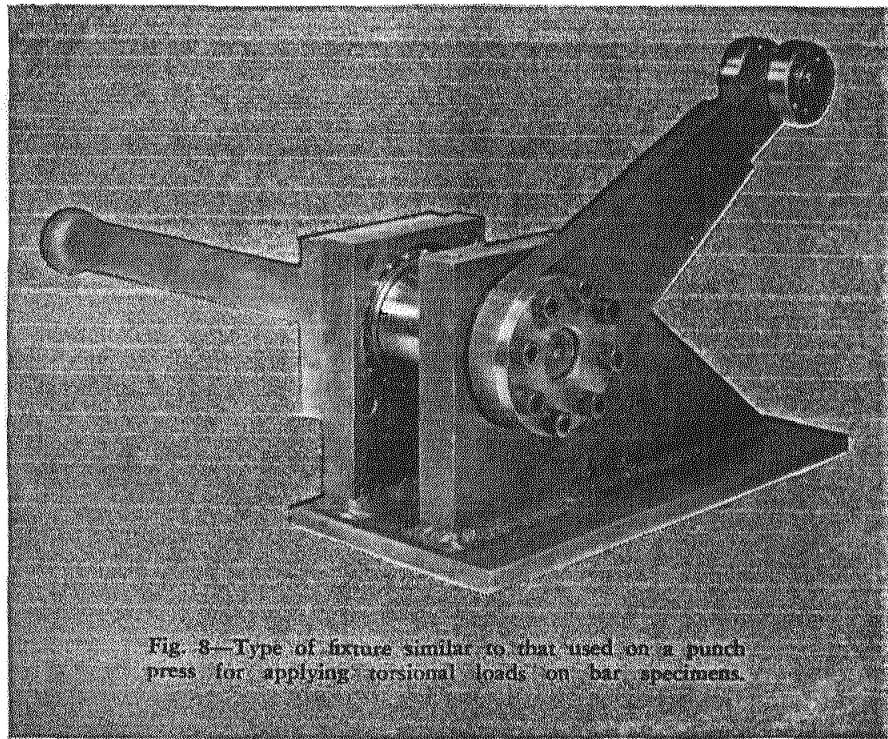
Type of fixture similar to that used on a punch press for applying torsional loads on bar specimens.
